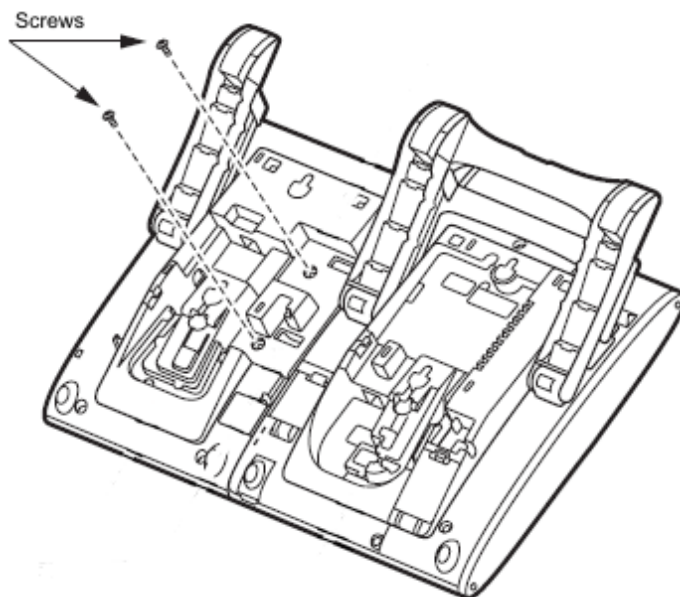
Securing the DCL-60-1 CONSOLE with Screws
